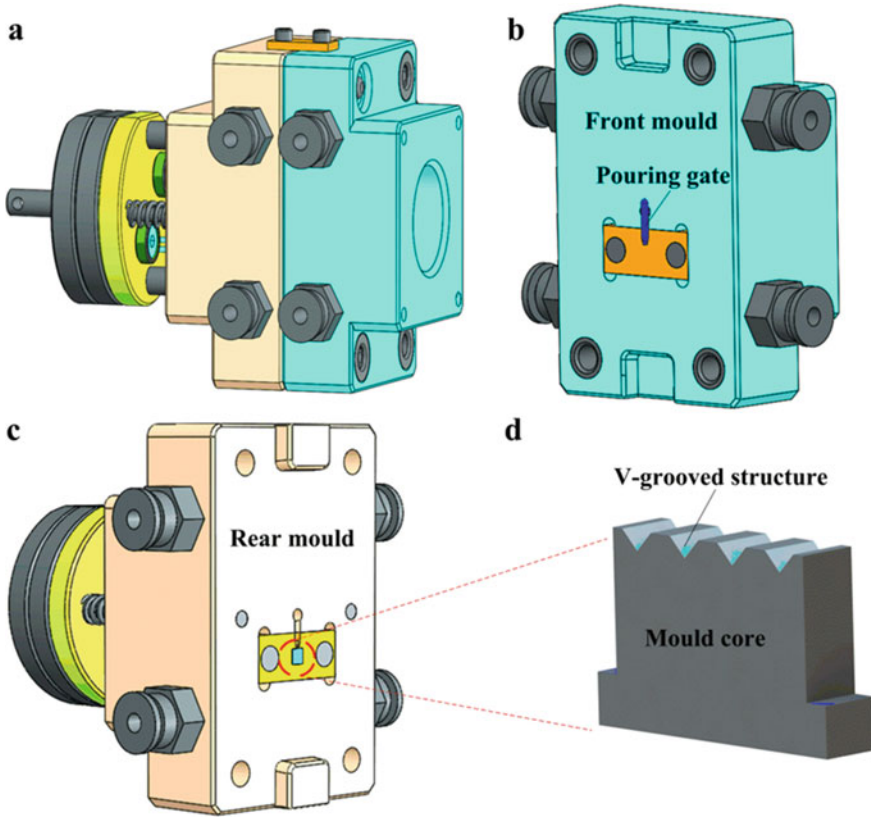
The design sketches of mold frame and mold core: a the whole mold frame; b the front mold; c the rear mold; d the mold core
